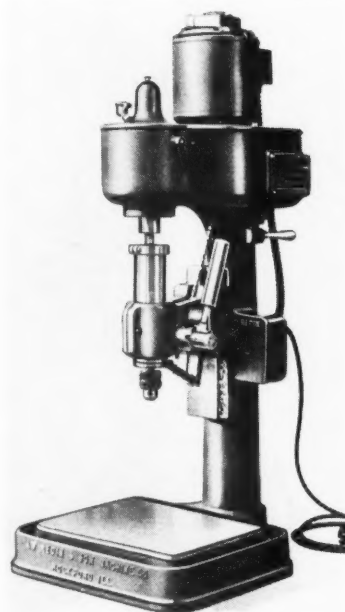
Drilling Machine with Rolling-wedge Transmission
